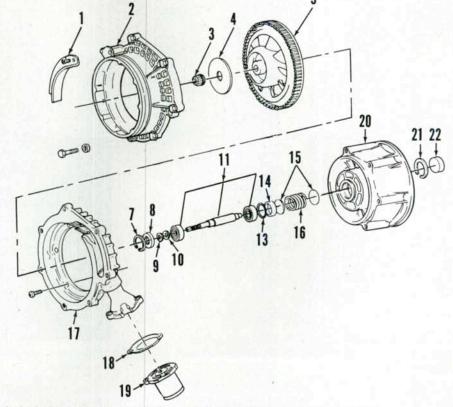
Exploded view of intercooler tip turbine fan used on Model TW-35.
